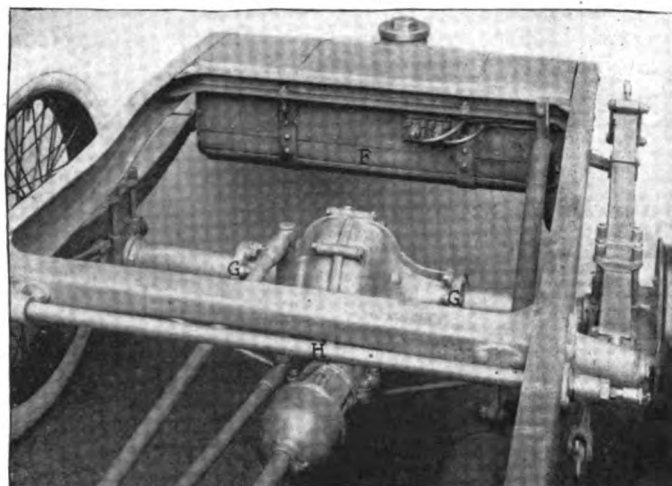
End view of the Napier 15-horsepower chassis. Note mounting of tank F, crosspiece H and torque connection G
